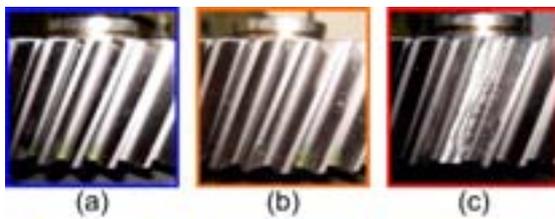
WTCMTR gearbox high speed pinion damage introduced for fault testing: (a) healthy, (b) damaged tooth and (c) missing tooth.
